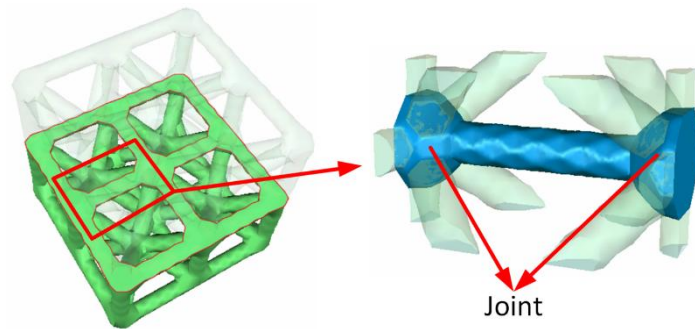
The geometrical model of the joint stiffening element inside a lattice structure.
